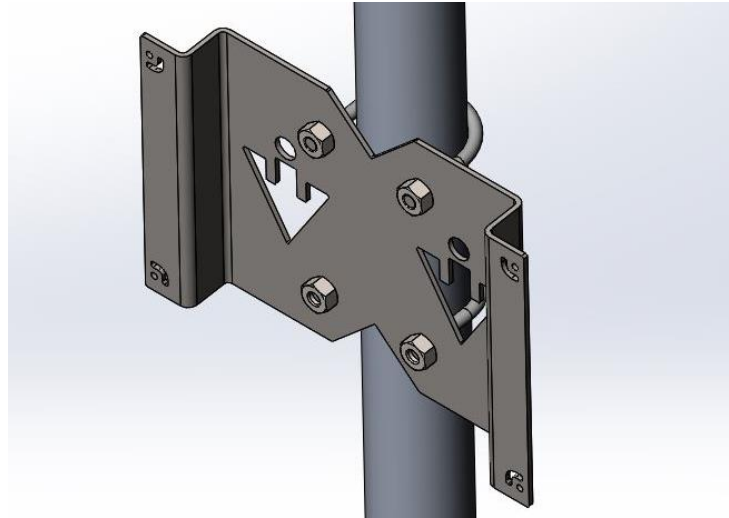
Mounting Bracket with Both U-Bolts and Nuts
